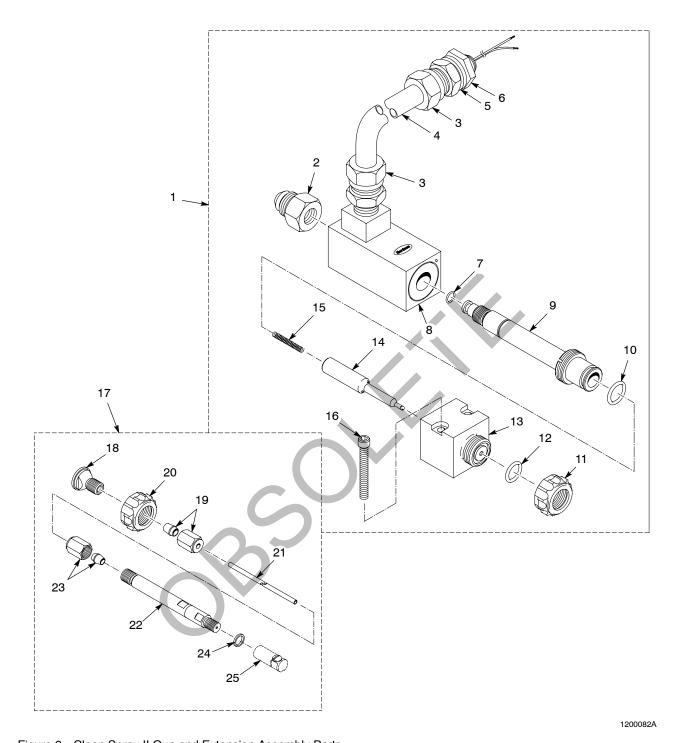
Clean Spray II Gun and Extension Assembly Parts
